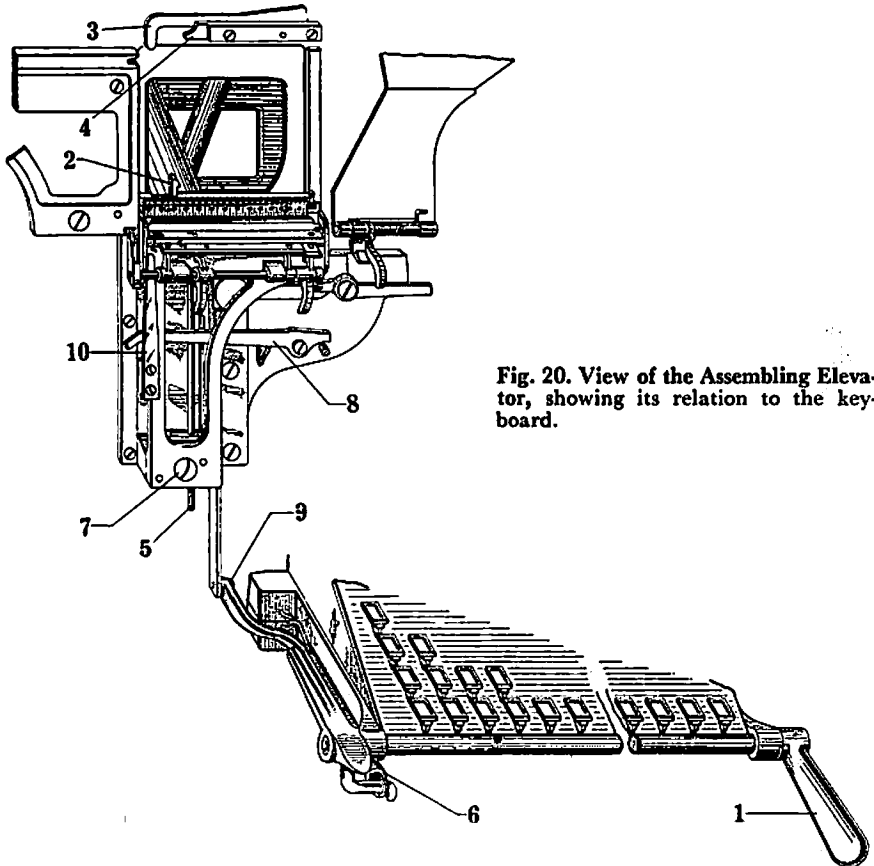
View of the Assembling Elevator, showing its relation to the keyboard.
